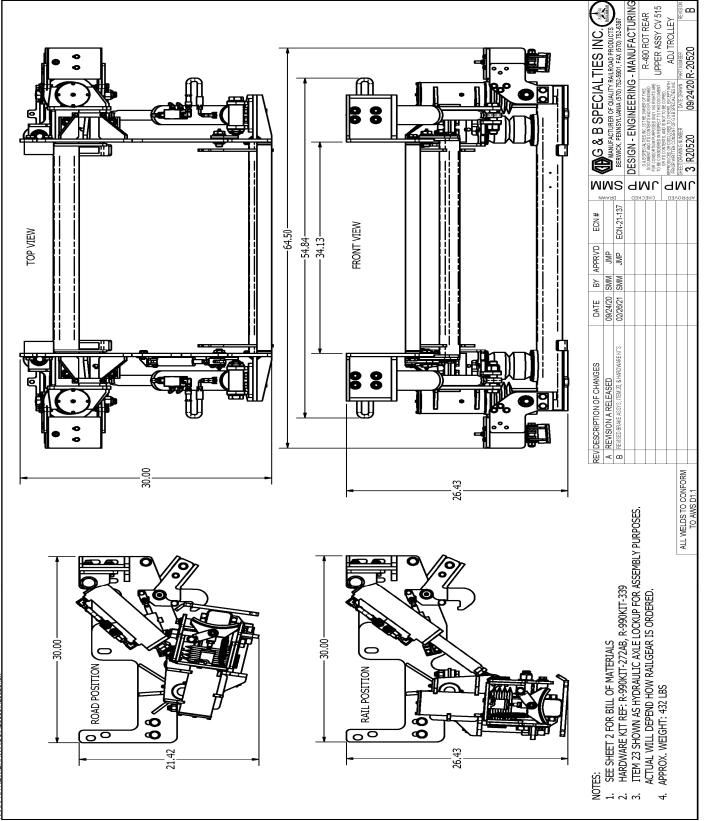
R-20520 Sheet 3 (R-490 Rotary Rear Upper Assembly)
